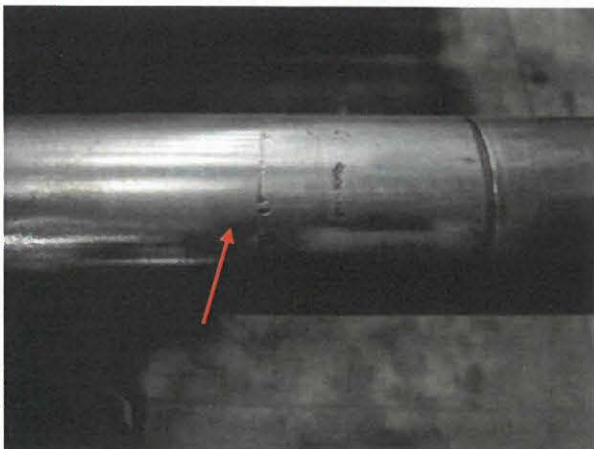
Shaft Galls At 1st Stage Impeller Nut
